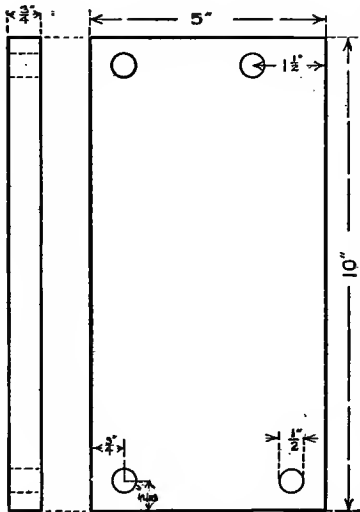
Complete Mechanical Drawing of the Base-Board for Bench-Hook.
